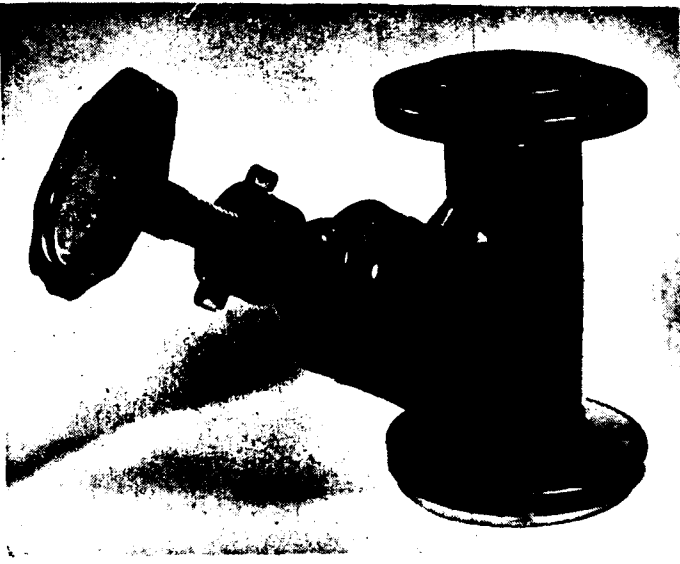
Valve for chemical plant cast in 'Araldite' casting resin B. The bore of the valve is 4 in.
